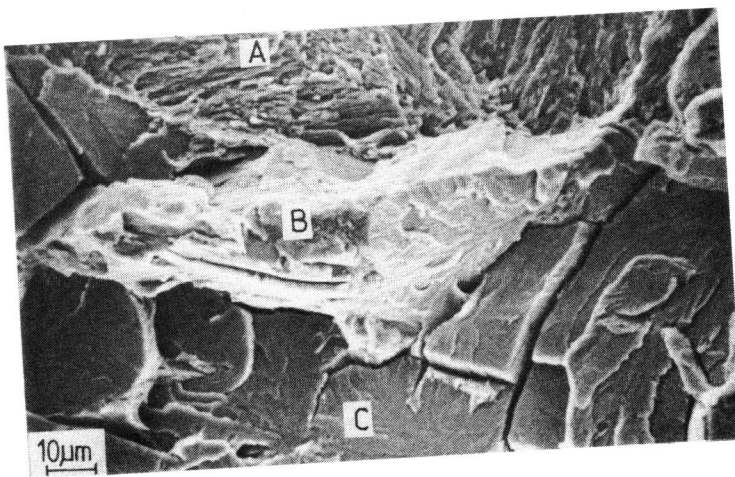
A fibrous fracture facet (B) adjacent to the tip of a fatigue crack (A). Area (C) is cleavage
